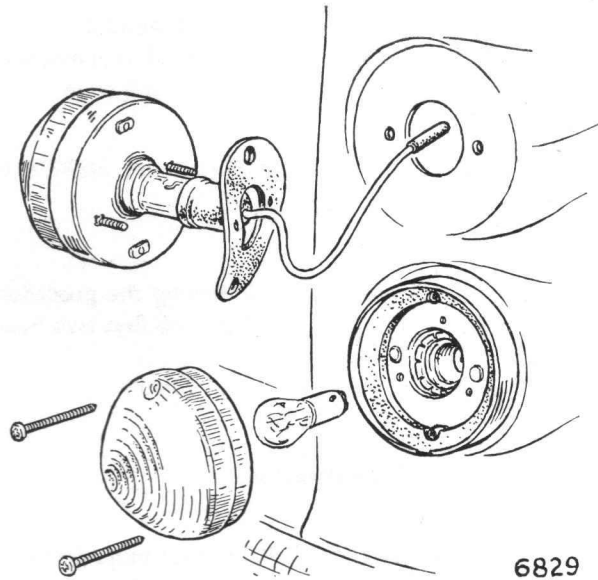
Exploded view of stop/tail and rear flasher lamps
